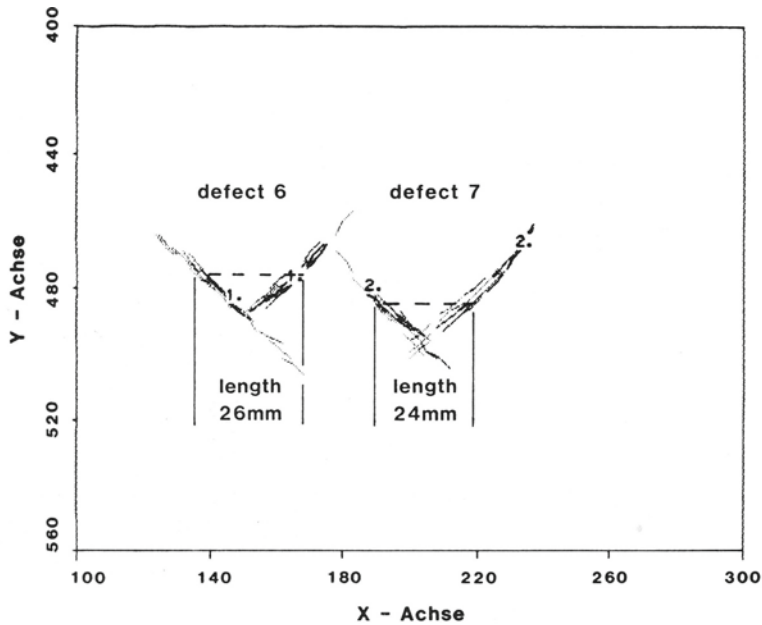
Example of a geometrical reconstruction; superposition of pulse-echo 45° , 60° and 90° inspection techniques
